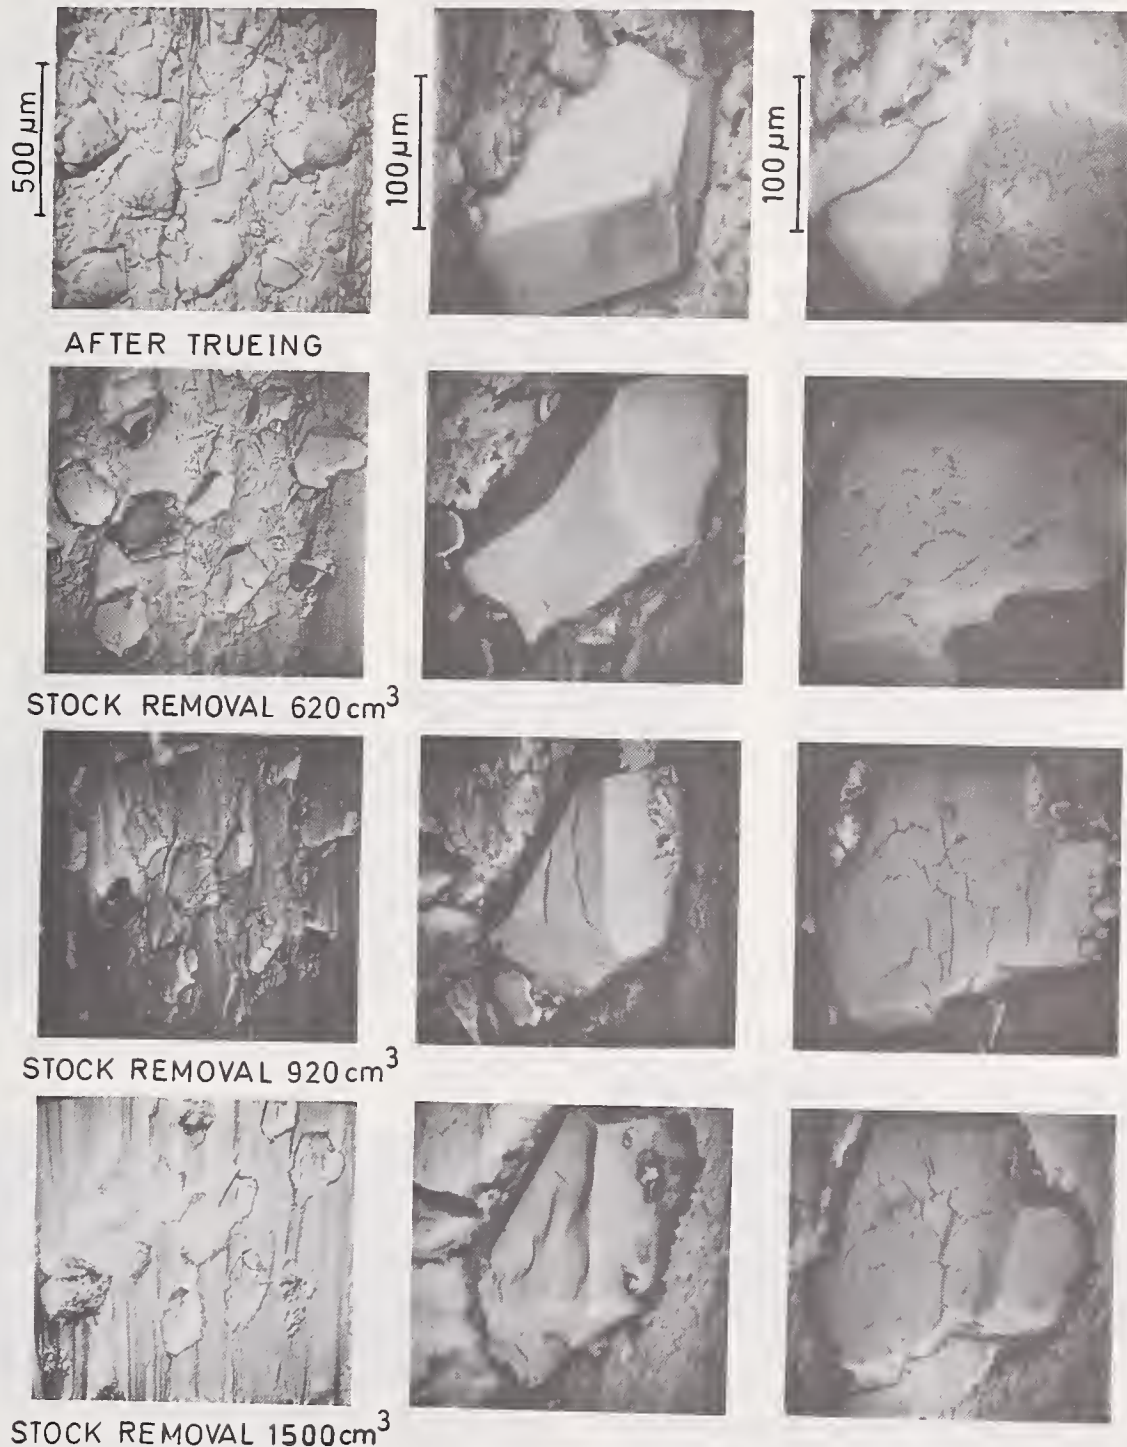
Wear behaviour of the bronze bonded diamond wheel containing manufactured MDA-S diamonds. Workpiece: Coors AD96.
